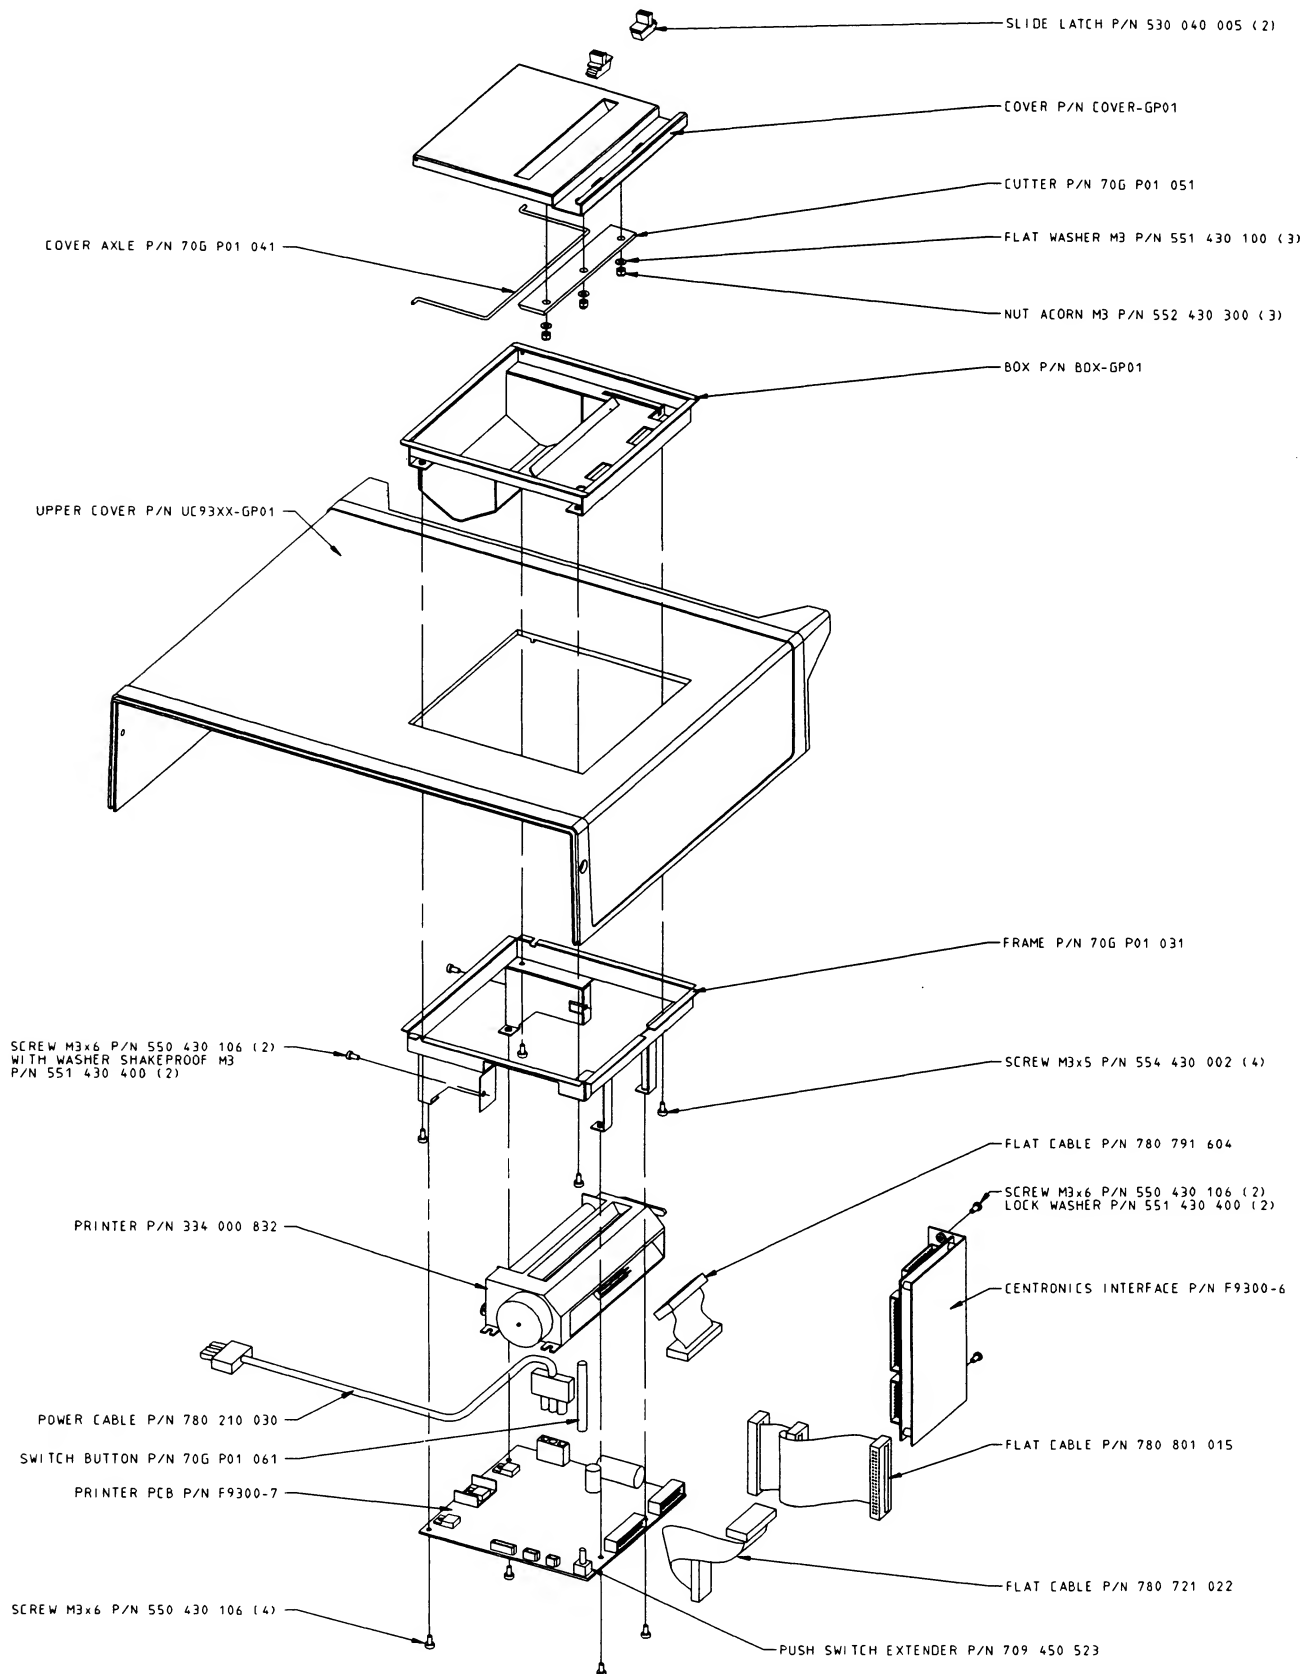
9320-GP01 ASSEMBLY: PRINTER OPTION
